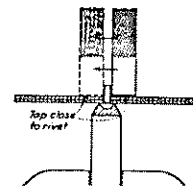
"DRAWING UP" WITH A FLAT HAND SET
